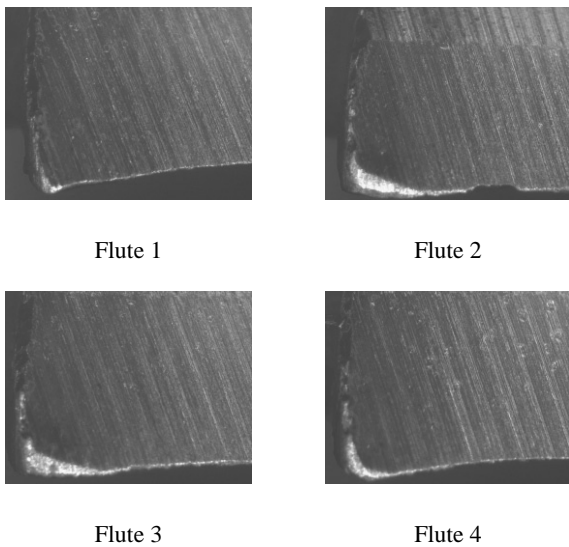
Flank wear under MQL machining at cutting speed of 10 m/min for 120 min
